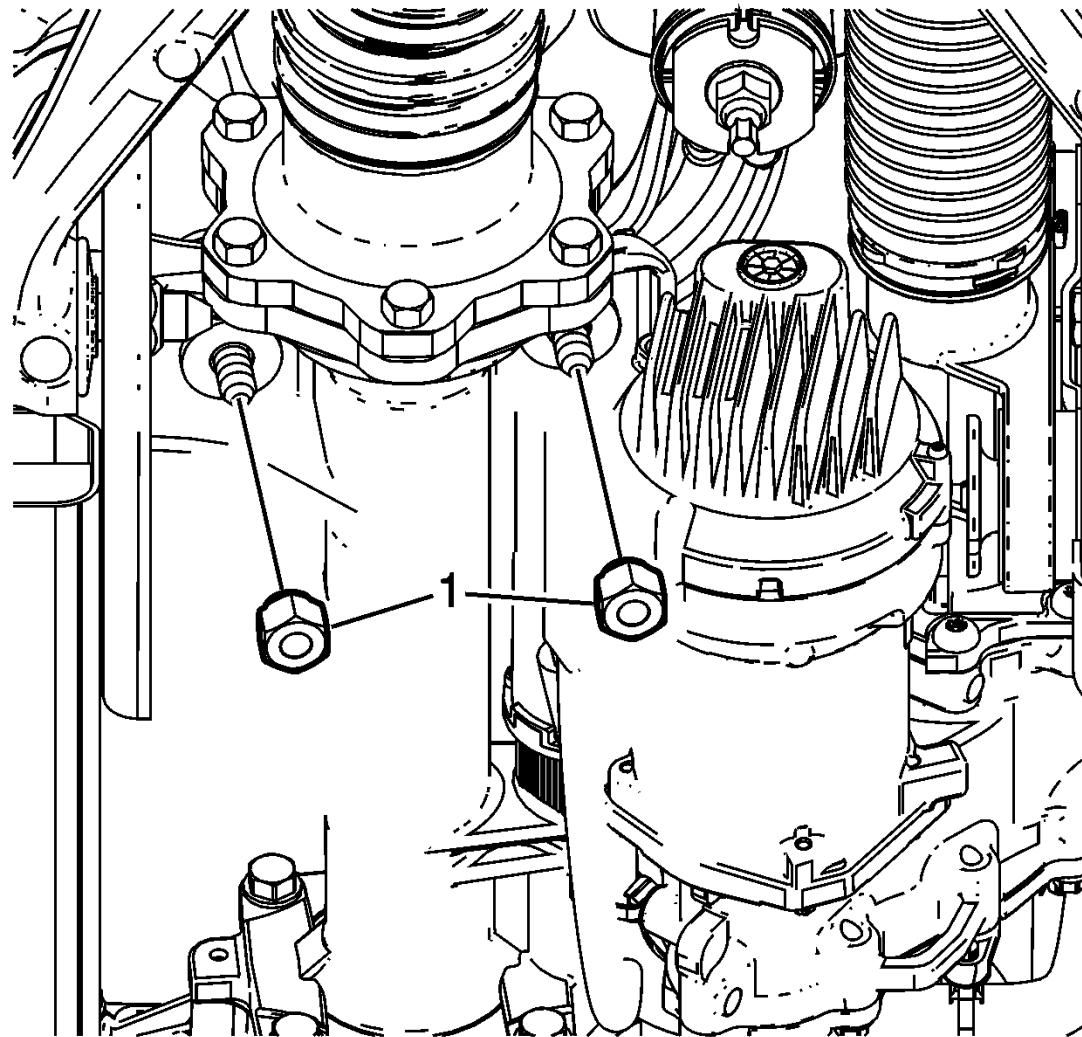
Inner Axle Shaft Housing Washers And Nuts
